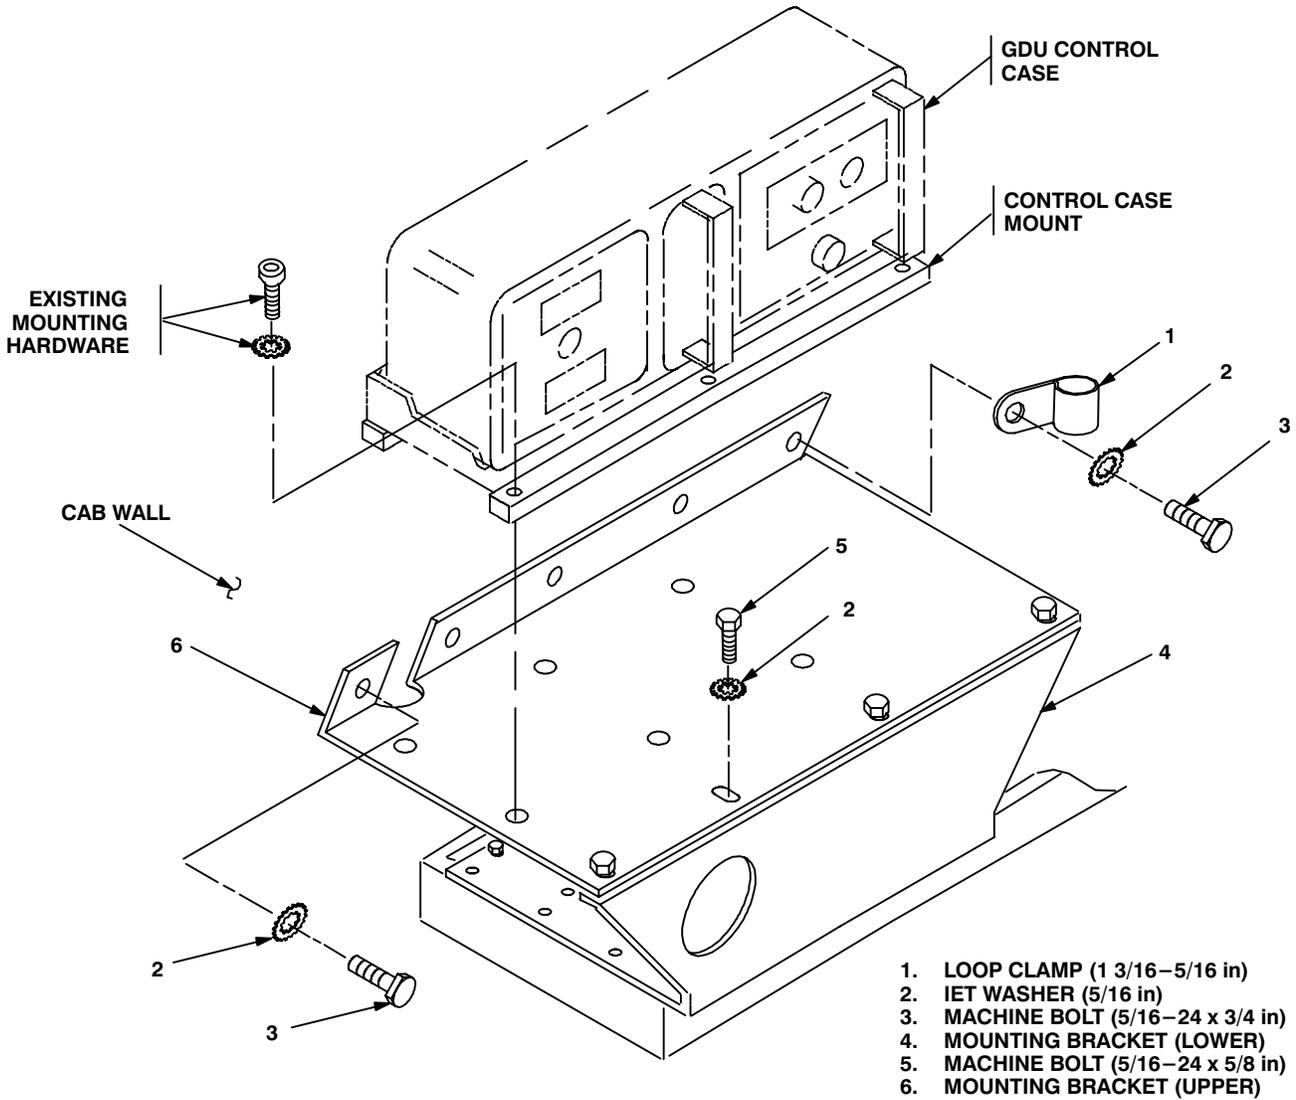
(3). Mounting Base Installation: Reinstalling Upper Mounting Bracket
